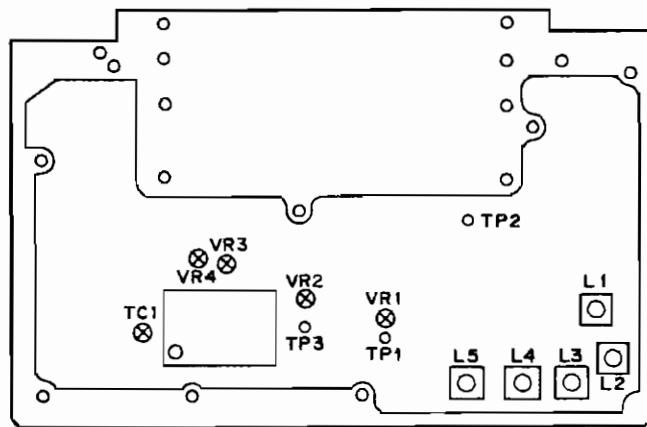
50 MHz BAND adjustment: Component layout (upper view)
